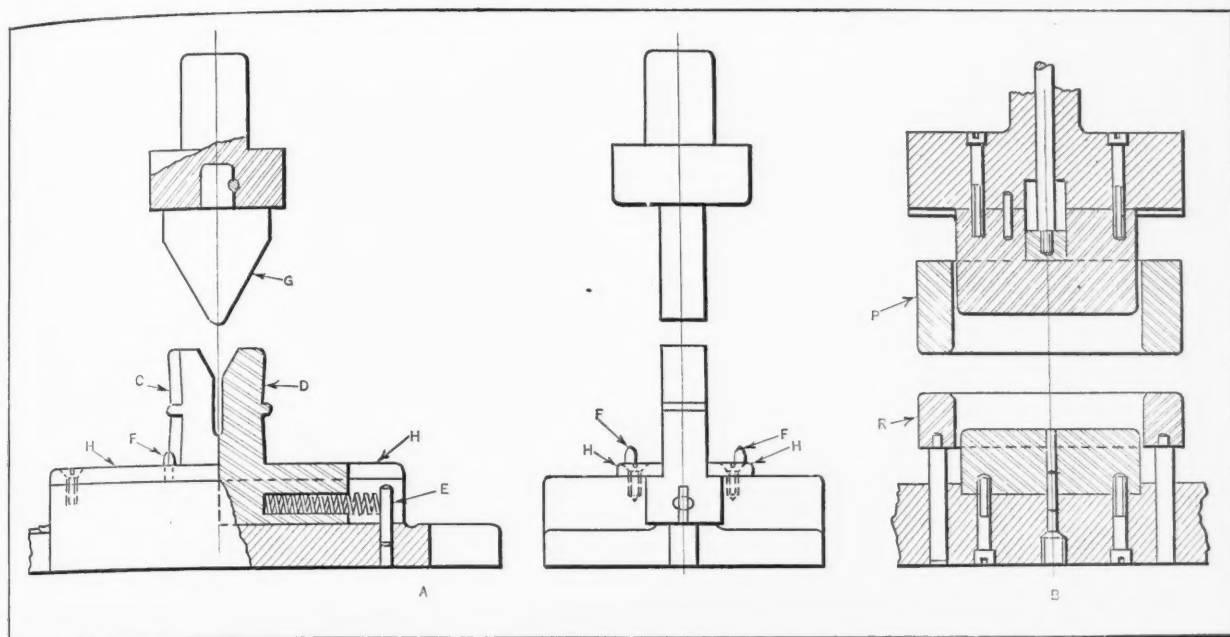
(A) Die for Forming Oval Jacket from Cylindrical Tube; (B) Bead-flattening Die
